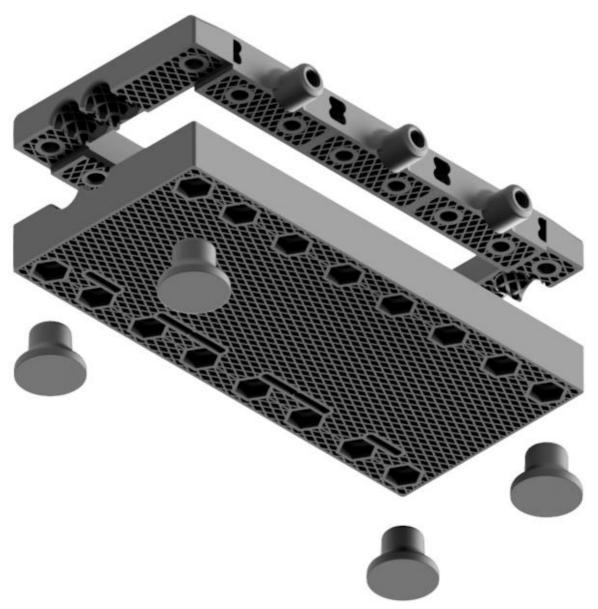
CAD image of casing elements, base plate, and feet. All parts were manufactured with a UV-curable resin printed by a DLP printer without additional printing support. Prism like internal structure was added to increase mechanical strength and provide a layer wise connection.
